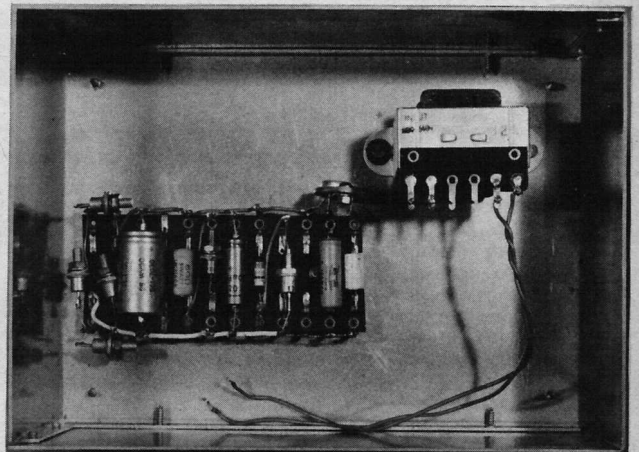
Assembly and wiring details of pulse generator (Board 'A'). Veropins should be used where connecting flying leads
